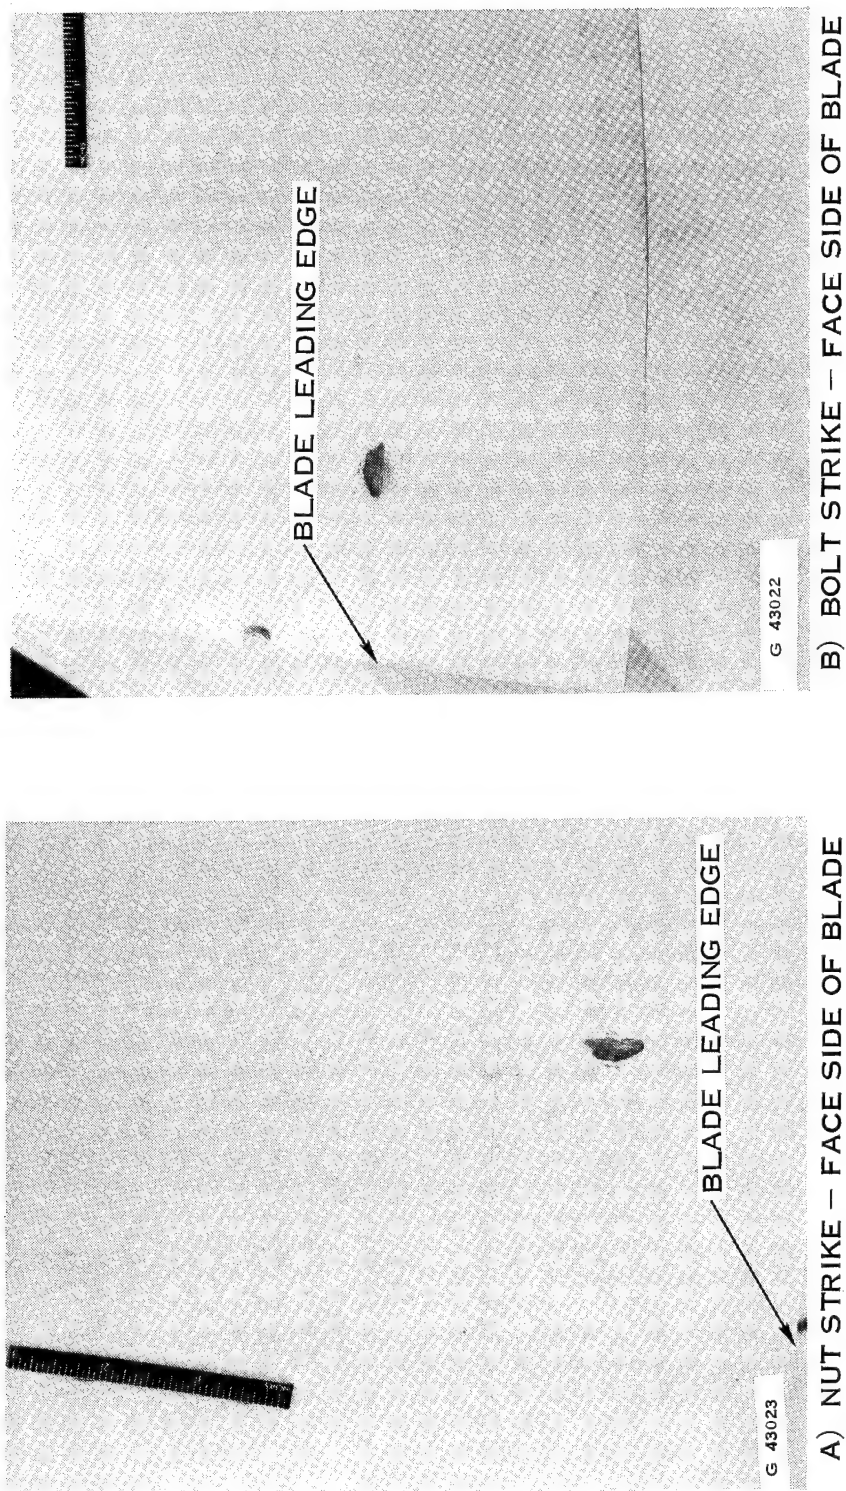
NUT AND BOLT STRIKES — BLADE B-1
